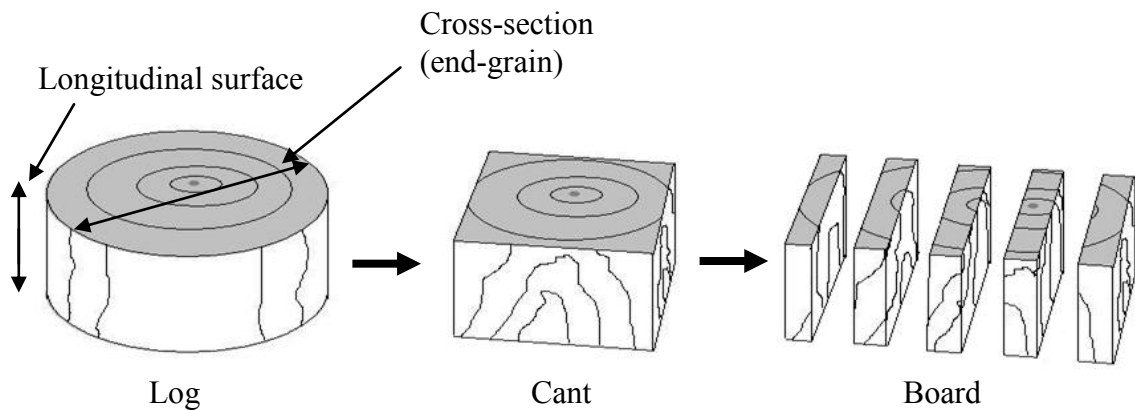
Drawing of a log, cant, and boards showing the longitudinal and cross-sectional dimensions.
